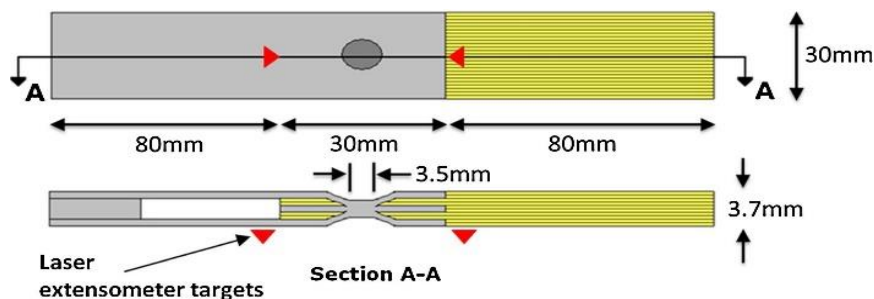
Diagram of the metal to carbon fibre spot weld-braze reinforced adhesive joint. Note: this diagram shows the preferred interleaved stacking sequence (ref.98).
